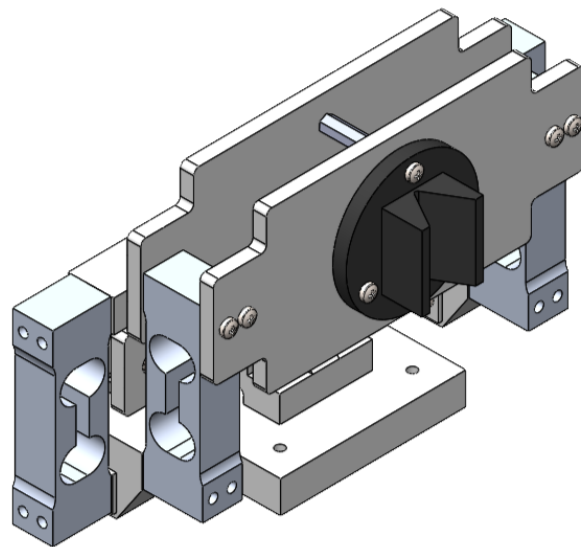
, Figure 4 and Figure 5 show the CAD drawings of the final MAFS design. The stand may change depending on where the MAFS is mounted.
